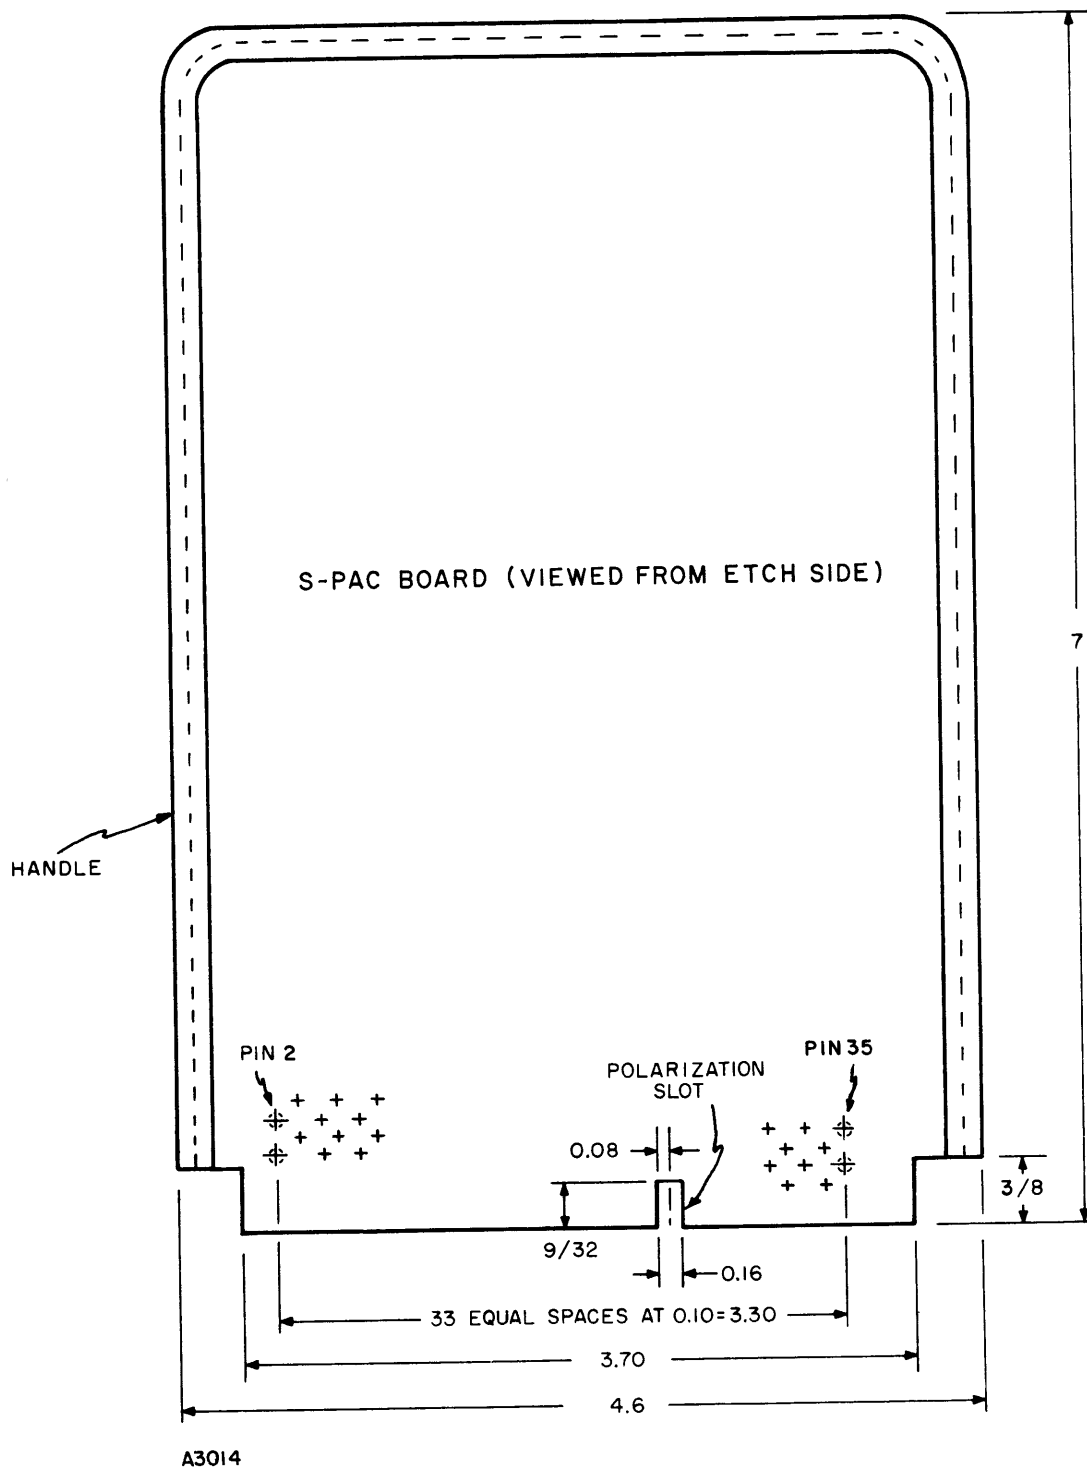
Standard S-PAC Mechanical Dimensions
